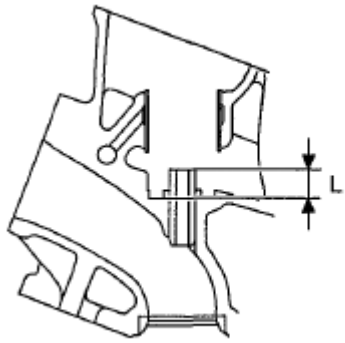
Installing Valve Guide In Cylinder Head Using Special Tool
